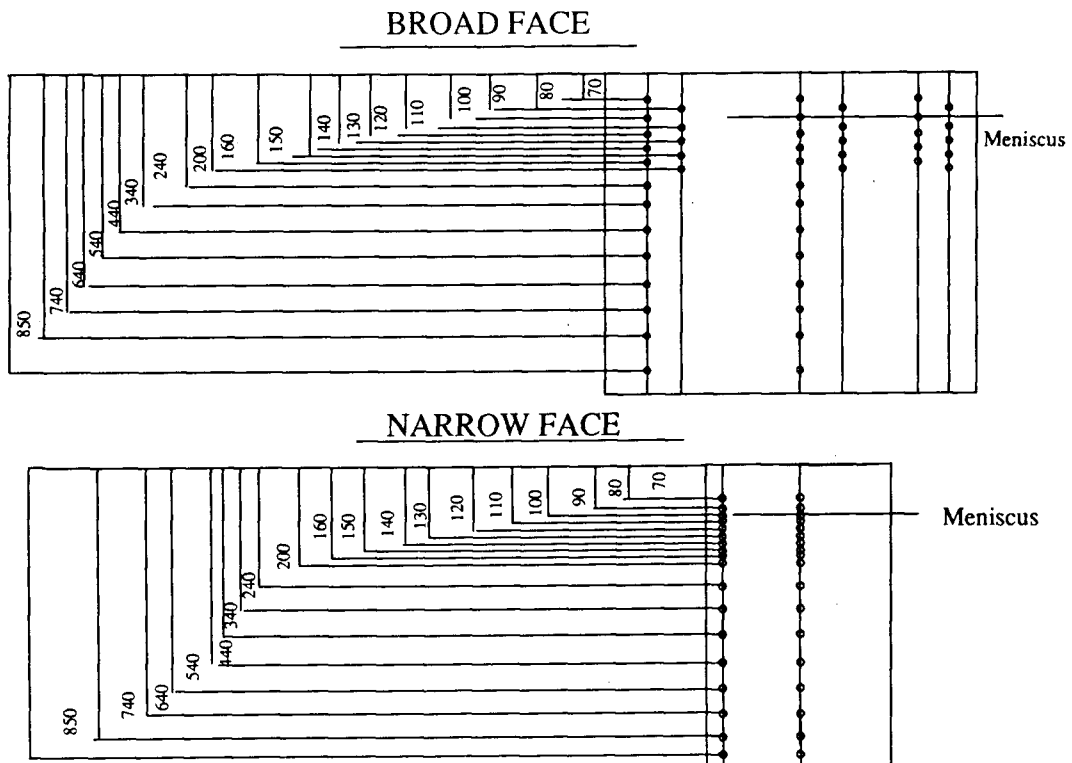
Schematic drawing showing the lay-out of the thermocouples on the broad and the narrow faces (all dimensions are in mm).
